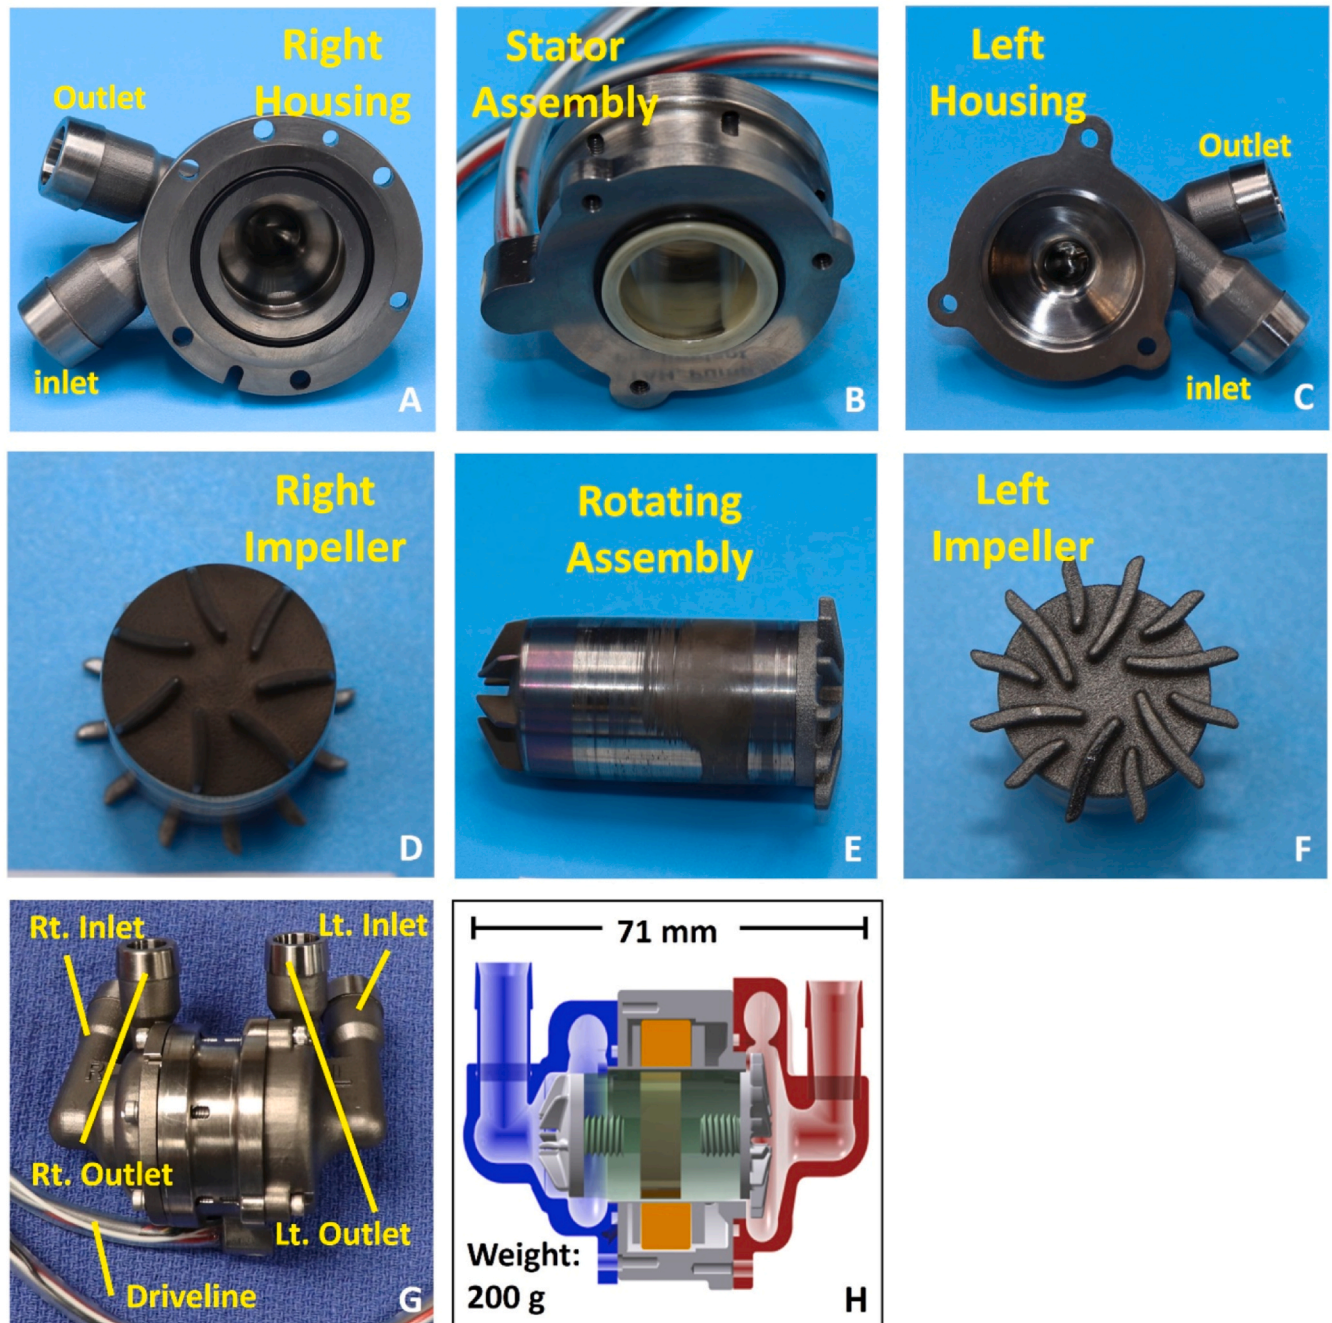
Exploded view of P-CFTAH pump showing the 4 major assembly subcomponents: (A) right housing, (B) stator assembly, (C) left pump housing, (D) right impeller of rotor assembly, (E) rotor assembly, and (F) left impeller of rotor assembly. (G) Photo of assembled P-CFTAH and (H) a schematic illustration of assembled P-CFTAH. P-CFTAH, pediatric continuous-flow total artificial heart.
